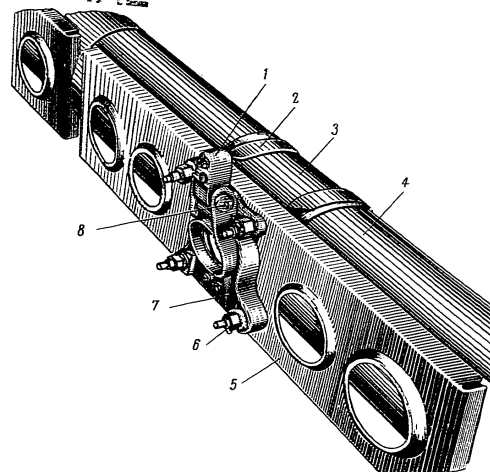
ATTACHMENT OF BLADE LIFTING UNIT TO SPAR
